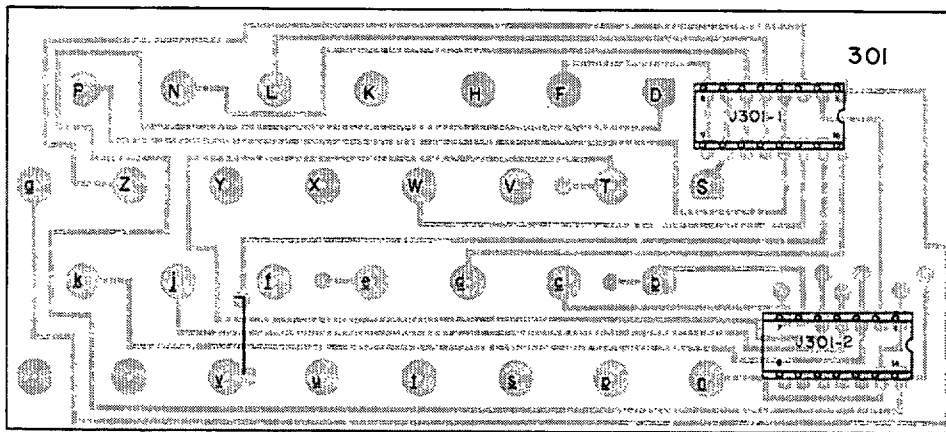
P.C. BOARD ASSEMBLY, BOARD 301, DRAWING
